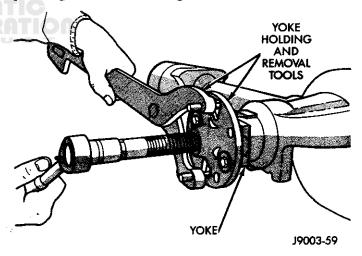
Drive Pinion Gear Shaft (Axle) Yoke Removal
